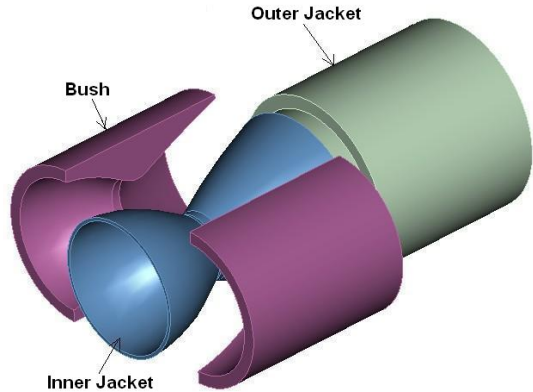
Manufacturing method of bush insert type nozzle throat part[5].
